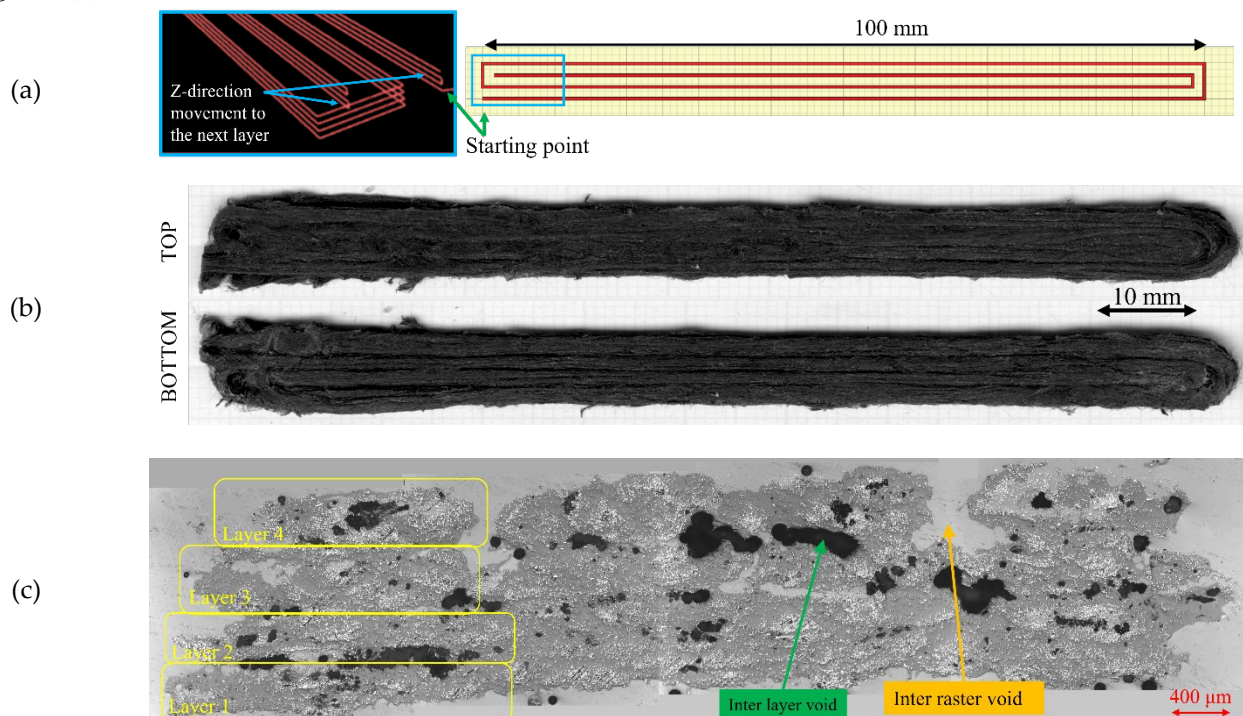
(a) Printing path for 4-layer stacking tensile specimen; (b) top and bottom surface of an actual 100-mm-long tensile specimen, (c) cross-section of the printed part showing four layers with four adjacent rasters on each layer.
